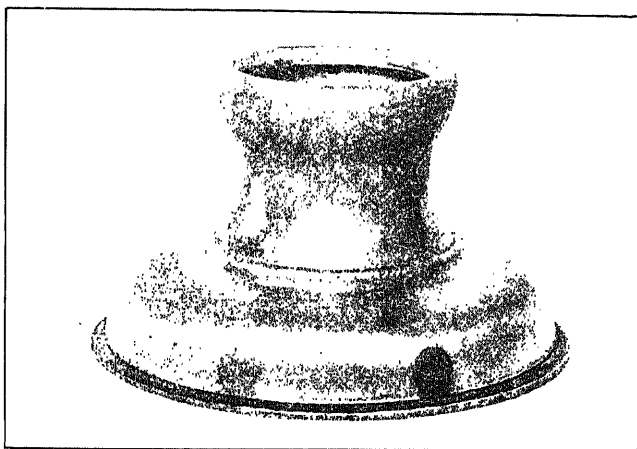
Welded Automobile Hub Stampings.
